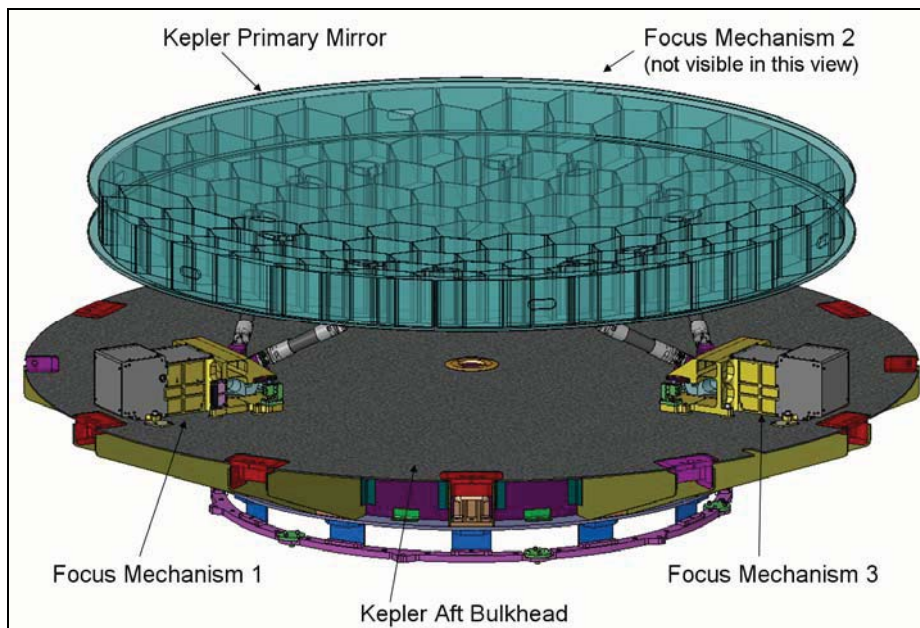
Solid Model of Kepler Primary Mirror/Focus Mechanisms/Aft Bulkhead Assembly.
